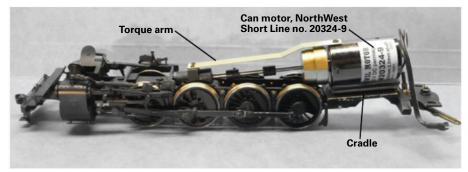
A shiny new motor. A can motor replaced the original motor. Peter added a torque arm to fix the relative position of the motor and gearbox.
